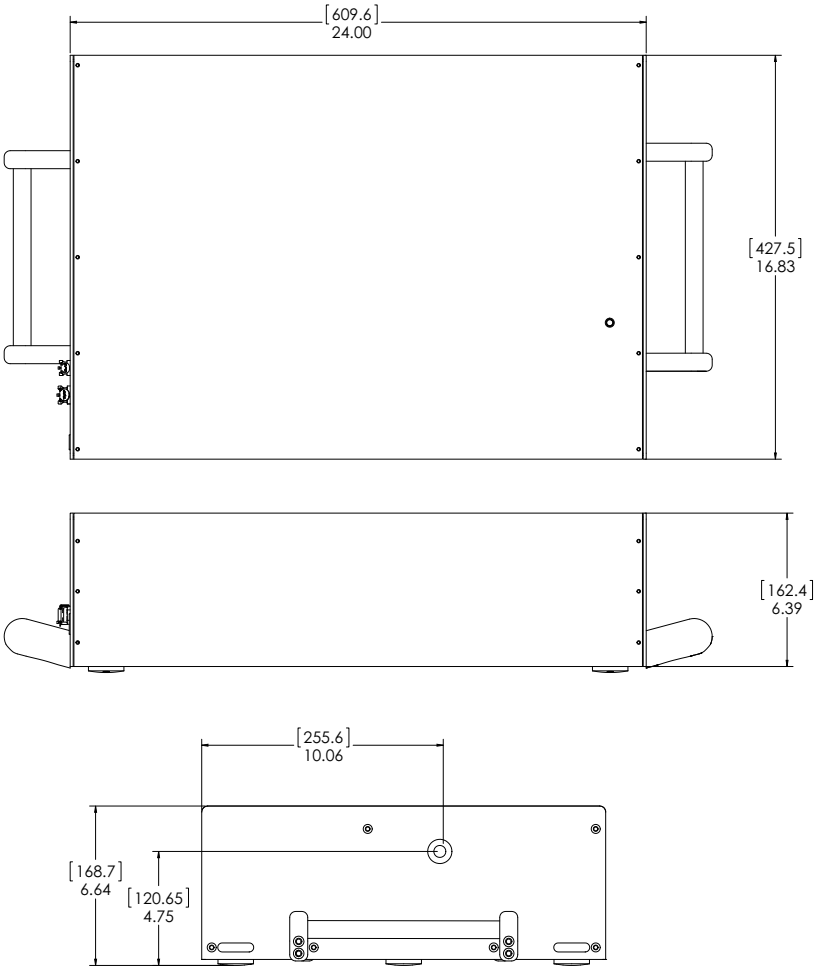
Vitara-T & Vitara-S Seed Laser Head Dimensions
